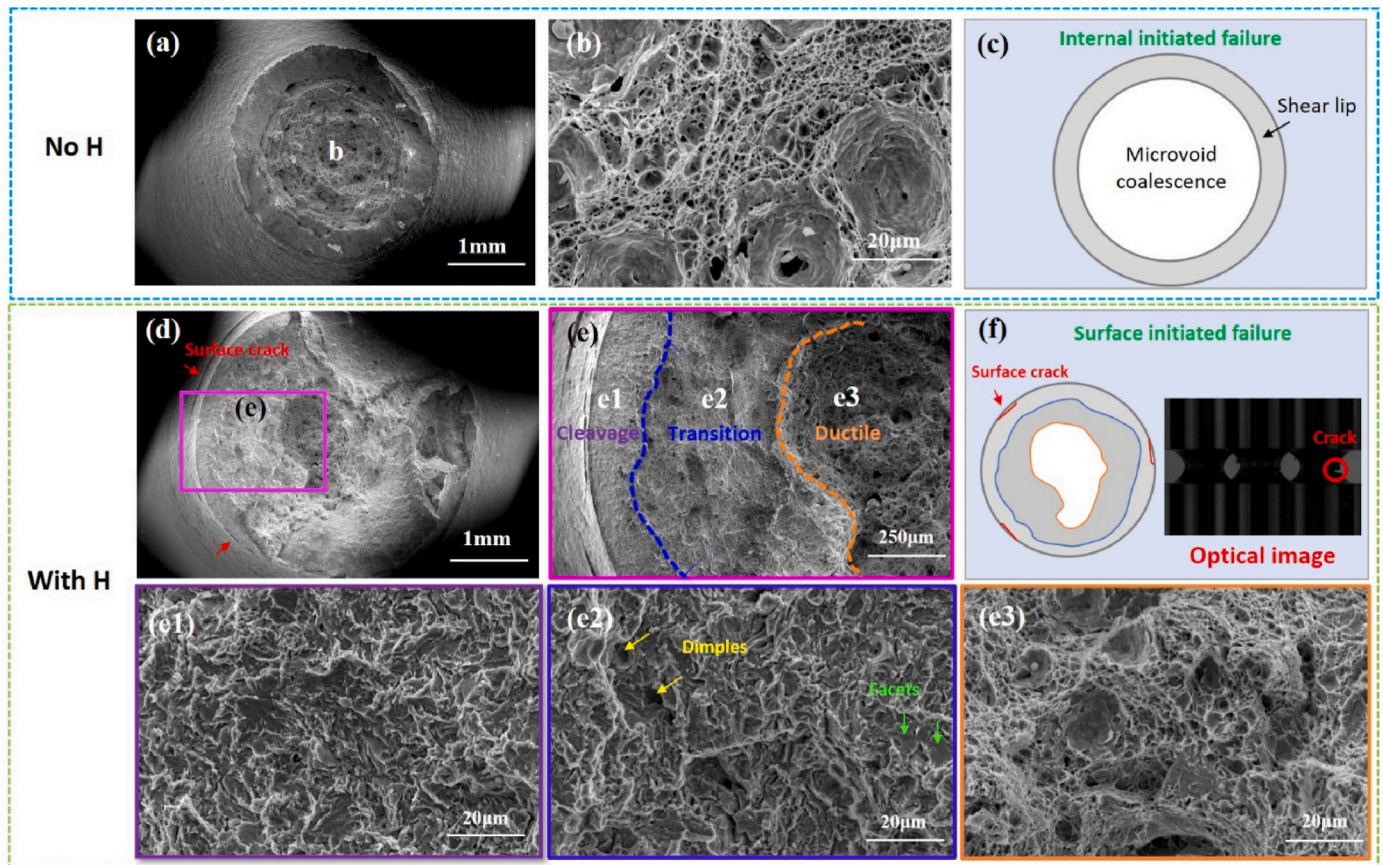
The fracture surfaces of M-notch specimen failed in air (a–c) and in hydrogen charging condition (d–f), indicating the center-initiated ductile fracture and the surface-initiated mix-mode fracture, respectively.
